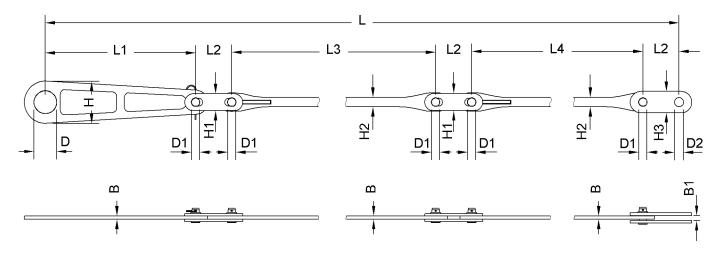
Jib pendant strap dimensions (A-frame 2 to 0906 jib head)
